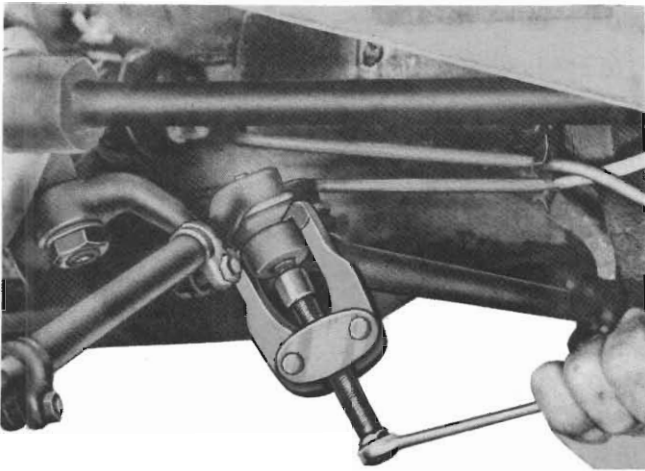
Removing the tie rod end stud (Tool E2C15)
